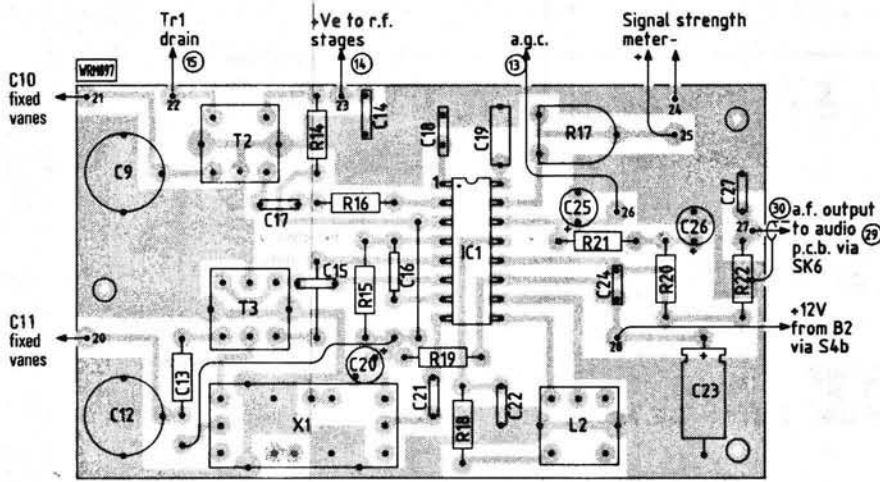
Single-sided track pattern (shown full size) and component overlay of h.f., i.f. and detector p.c.b.
